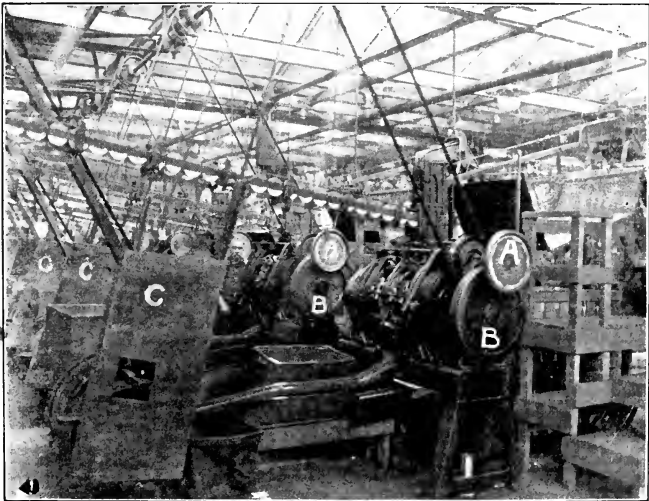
Illustration No. 6. Can ending machine showing handwheel ("A") and flywheel ("B") equipped with disc guard. Belts ("C") inclosed with metal sheeting.
